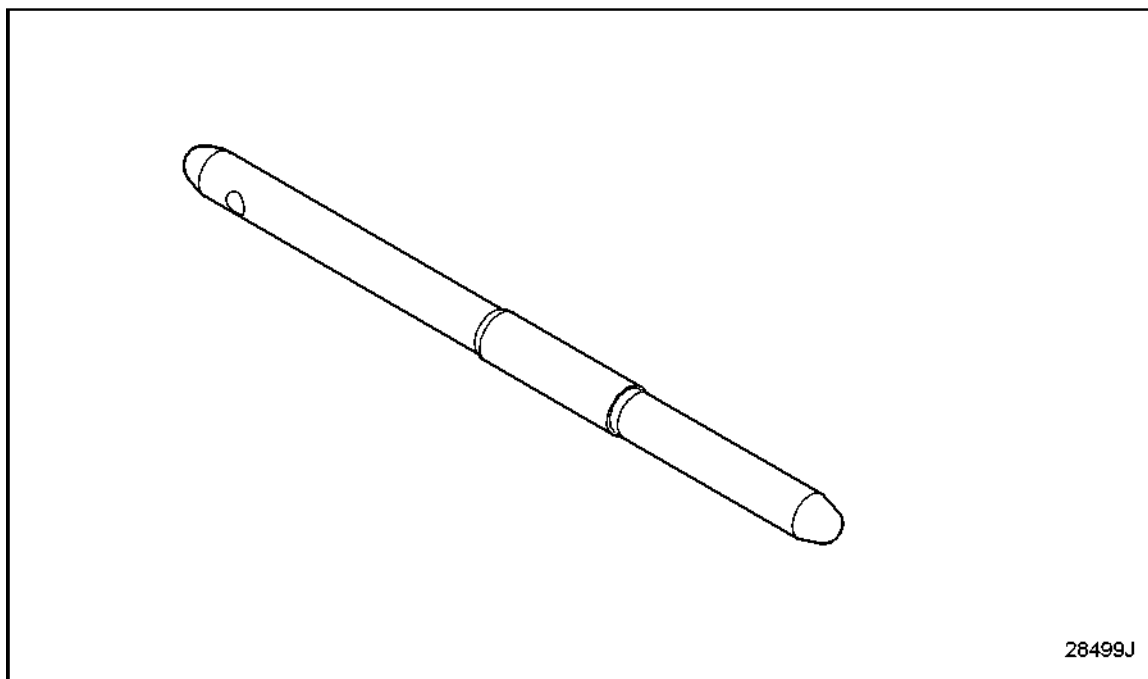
Cylinder Head Locating Pins,J 28511-C
